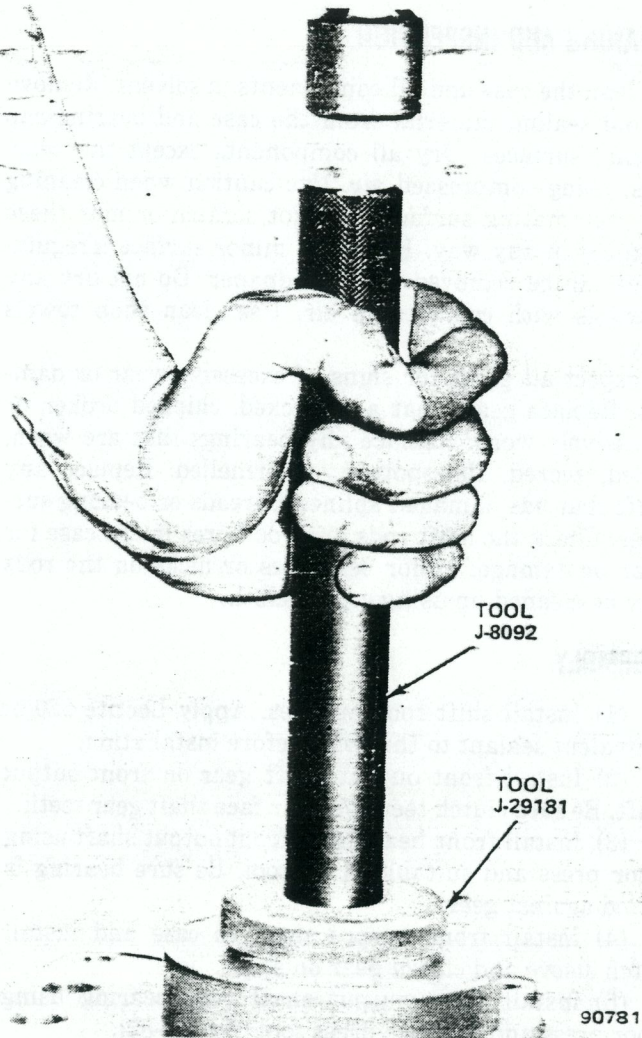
D-84 Front Output Shaft Front Bearing Race Installation
